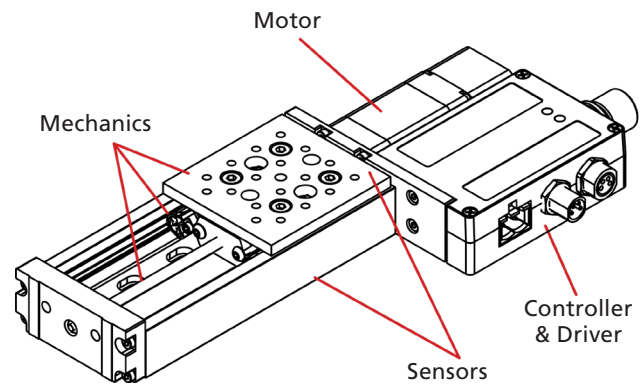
A Zaber X-LSM050 linear stage, which integrates mechanics, a motor, a motor driver and a controller into a single device.
